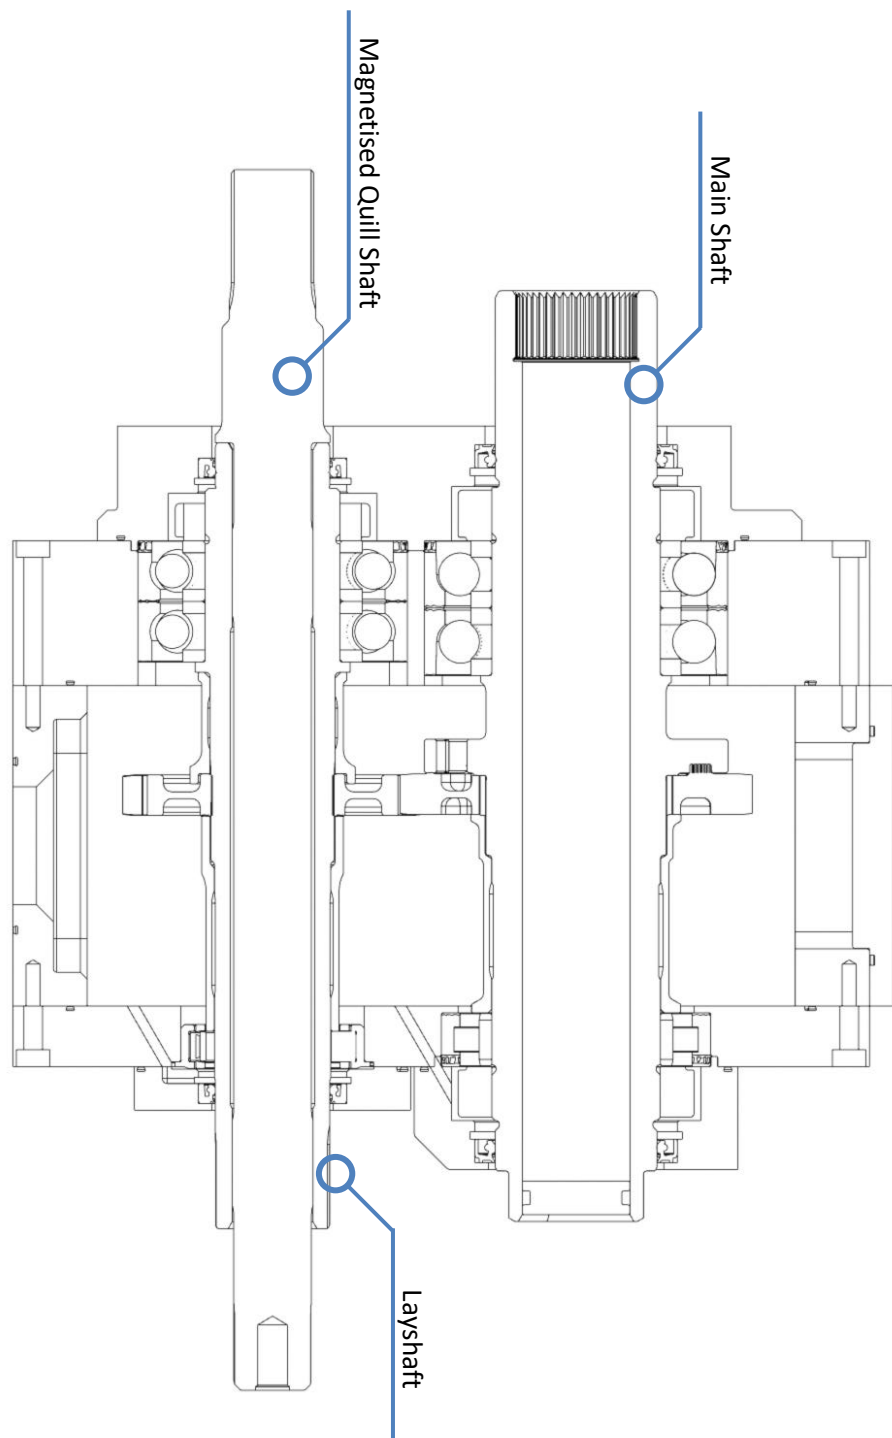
Planar section view of the Cardiff gear test rig slave housing.
